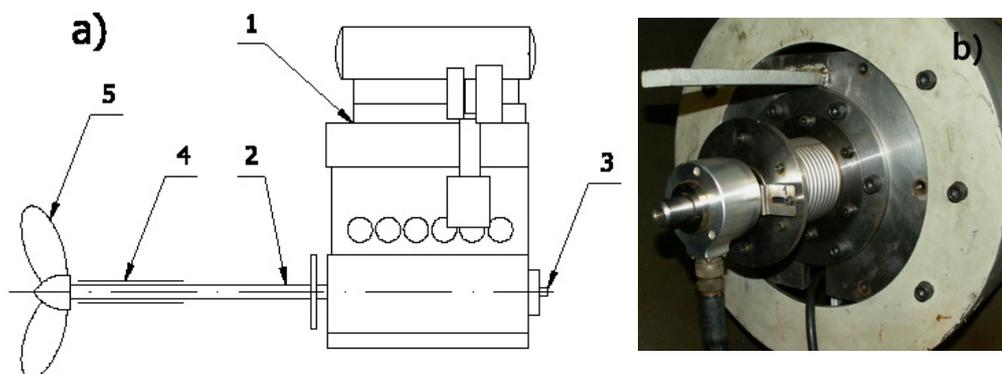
The propulsion plant: a) Schematic diagram; 1-Main engine; 2-Propulsion shaft; .3-Rotary incremental encoder; 4-Stern tube with stern bearings; 5-Propeller; b) Encoder attached to the crankshaft
